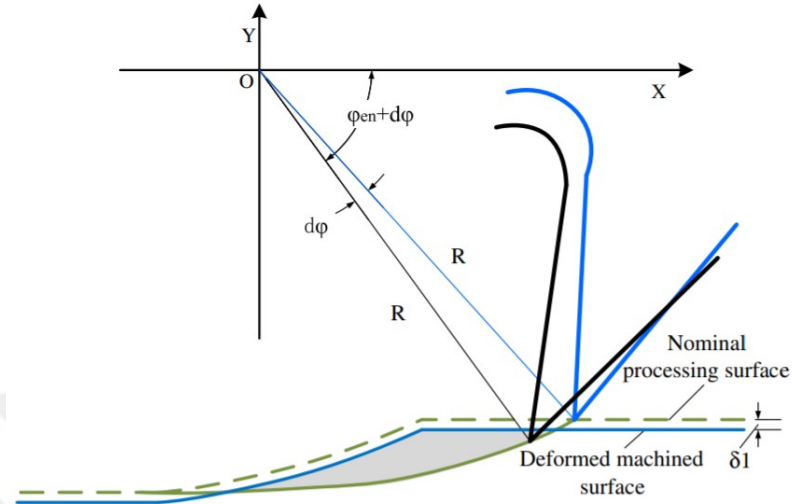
Effect of workpiece deformation on engagement of tool during cutting [28].
